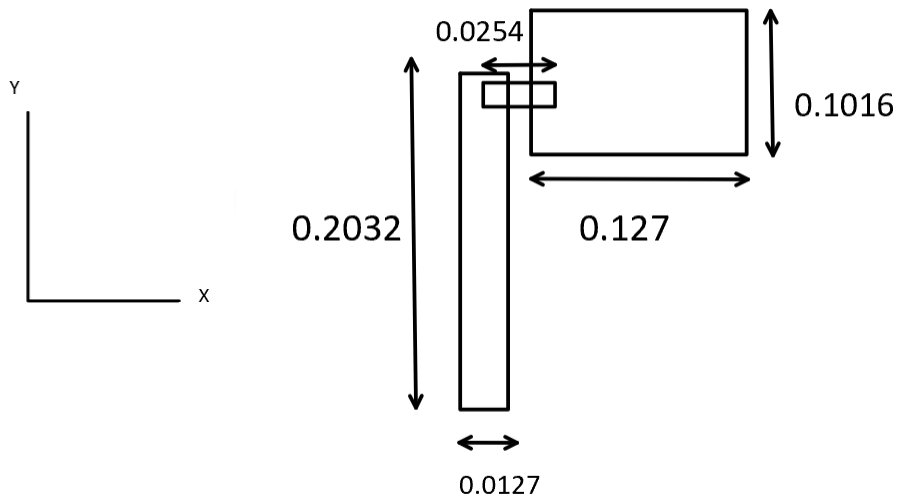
Top View of the Pedal and the Crank, Dimensions in Meters.
